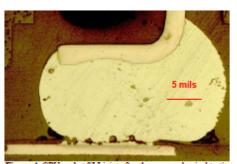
CPU socket SLI joint after thermo-mechanical testing showing a 100% fracture propagating along a plane of microvoids.
